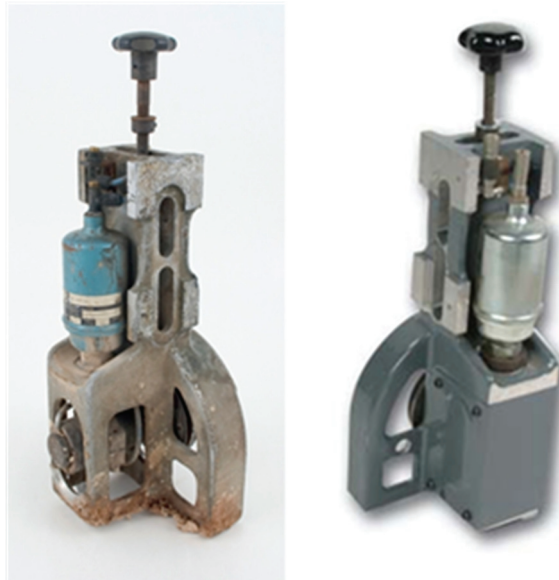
Upon receiving a slitter assembly (left) with an exchange tag and RGA#, Valmet immediately return ships a rebuilt assembly (right) from stock.
